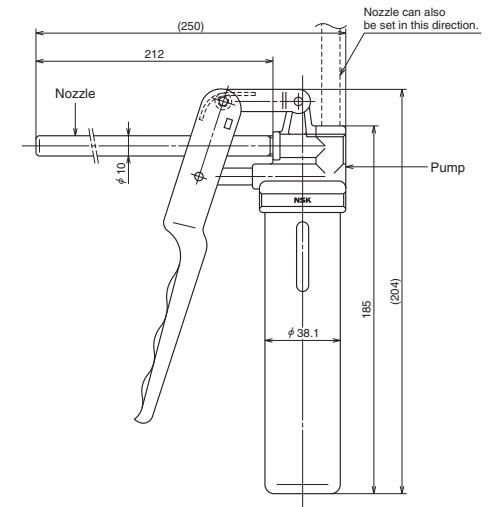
NSK Hand Grease Pump with NSK straight nozzle
